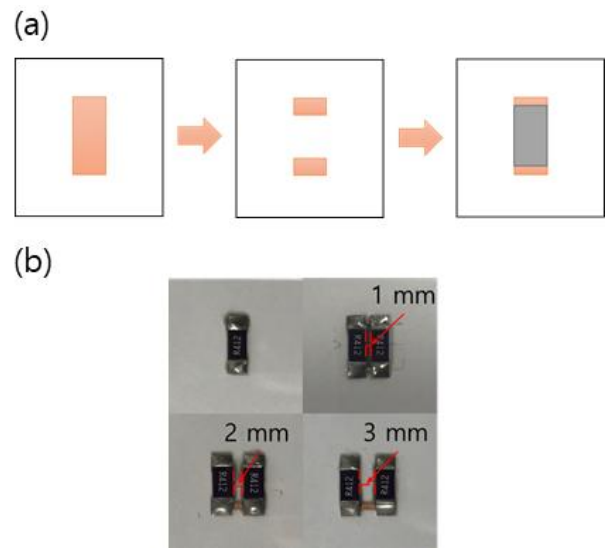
(a) Fabrication process of a heater using chip resistors for a PCR chip (b) Fabricated chip resistor heaters. 그림 4. (a) 칩 저항을 사용한 PCR 칩 히터 제작 과정 (b) 제작된 히터
